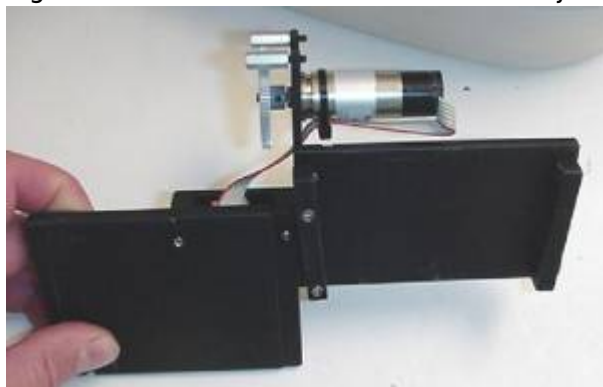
Base plate with Z drive removed, but with zoom motor installed
